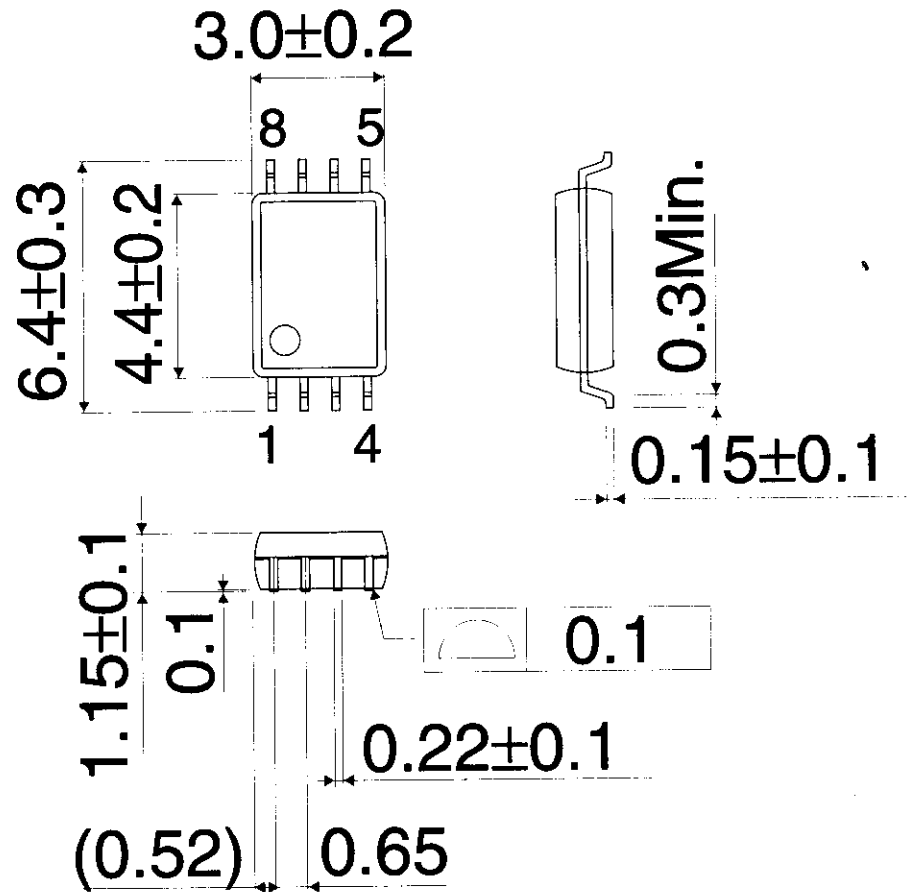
Outline Dimensions SSOP-B8(BR93L66FV-W)
